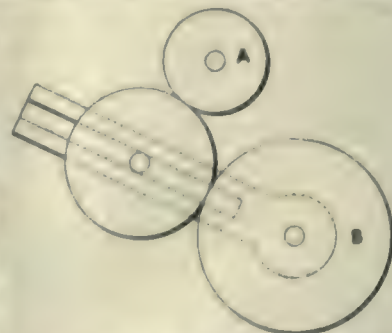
SEGMENT CONSTRUCTION FOR MOUNTING CHANGE GEARS
